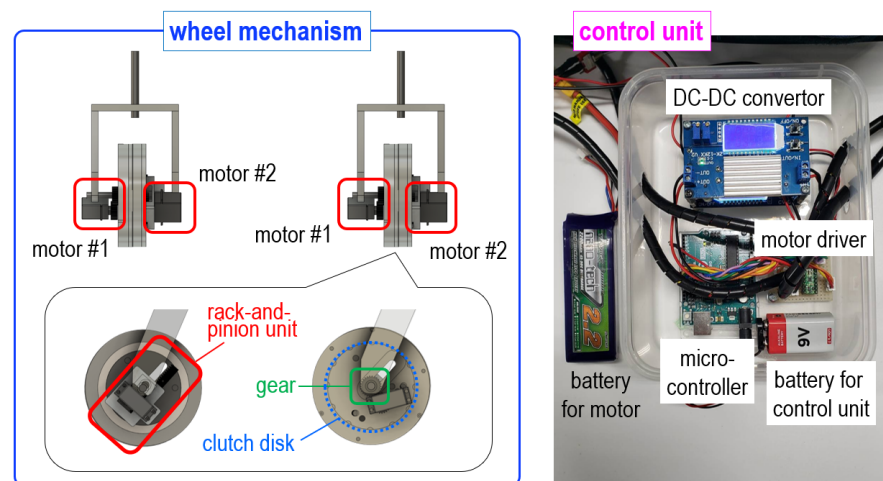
Details on the motor installation (left) of the wheel-mechanism prototype and the electronic components (right) of the control unit.
